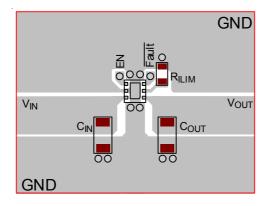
PCB Layout Guide for WDFN-6SL 2x2
